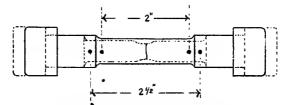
TEST PIECE, CIRCULAR SECTION.
